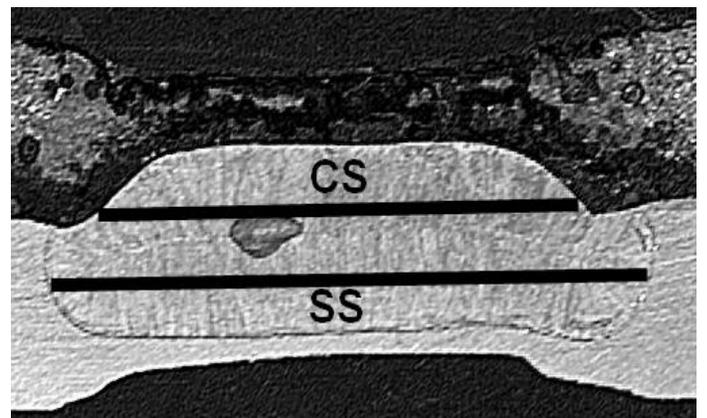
(b) Welded at 7 kA and 20 Cycle
